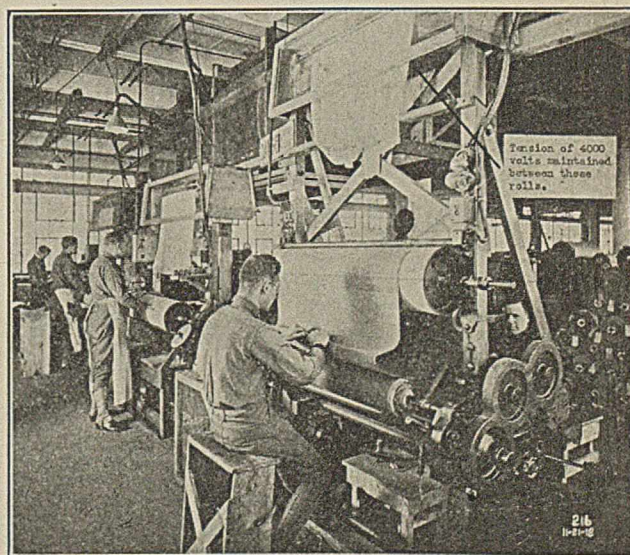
HIGH TENSION ELECTRICAL TESTING MACHINES FOR FACE FABRICS TO DETERMINE PINHOLES OR FLAWS
